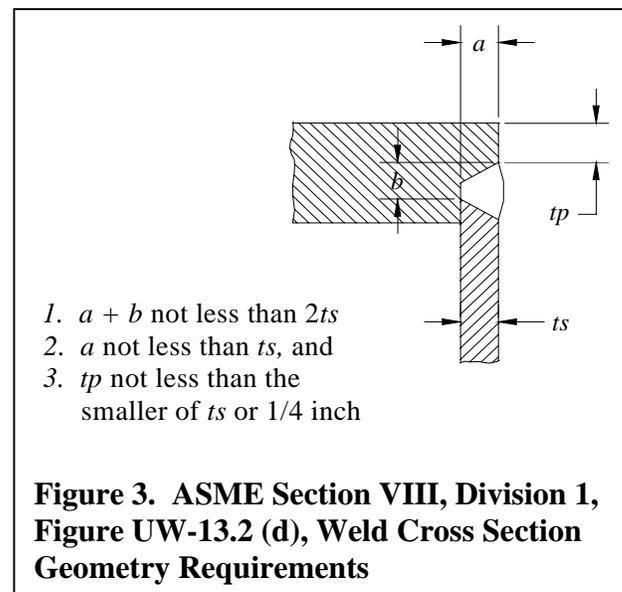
ASME Section VIII, Division 1, Figure UW-13.2 (d), Weld Cross Section Geometry Requirements
